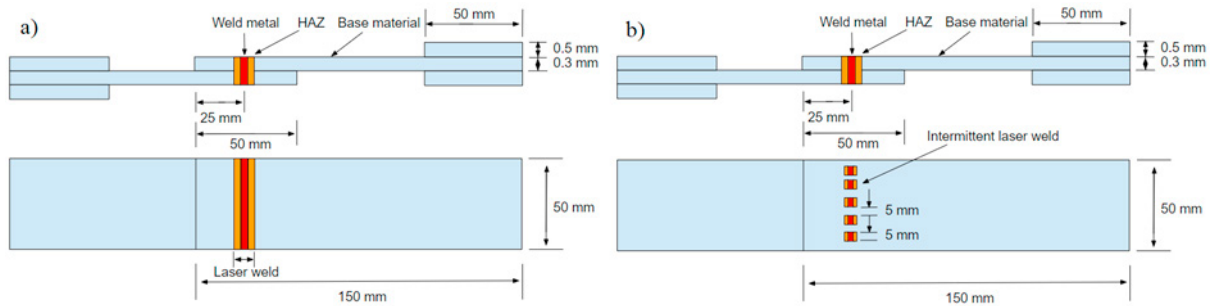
Specimen geometry for (a) continuous and (b) intermittent lap joints.
